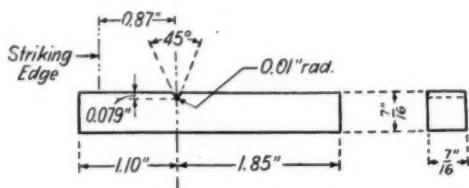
Specimen for Izod Impact Tests and Slow-Bend Tests.
